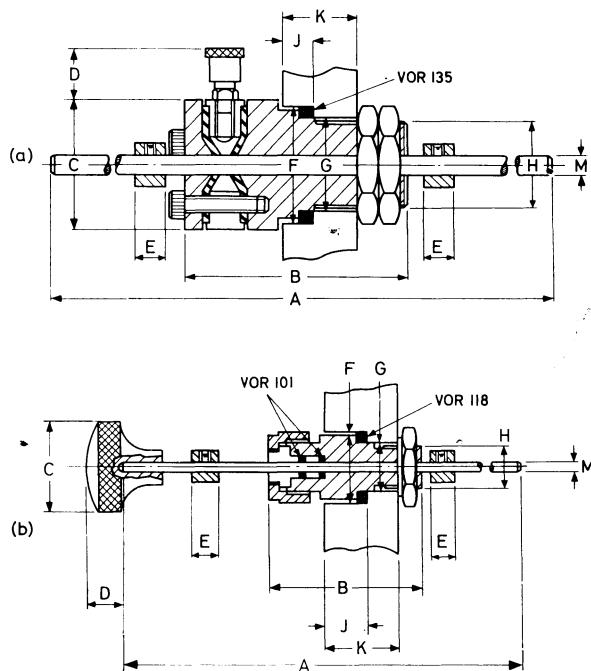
Dimensions of shaft seals supplied by Edwards³²⁸ (Table 5.5)
